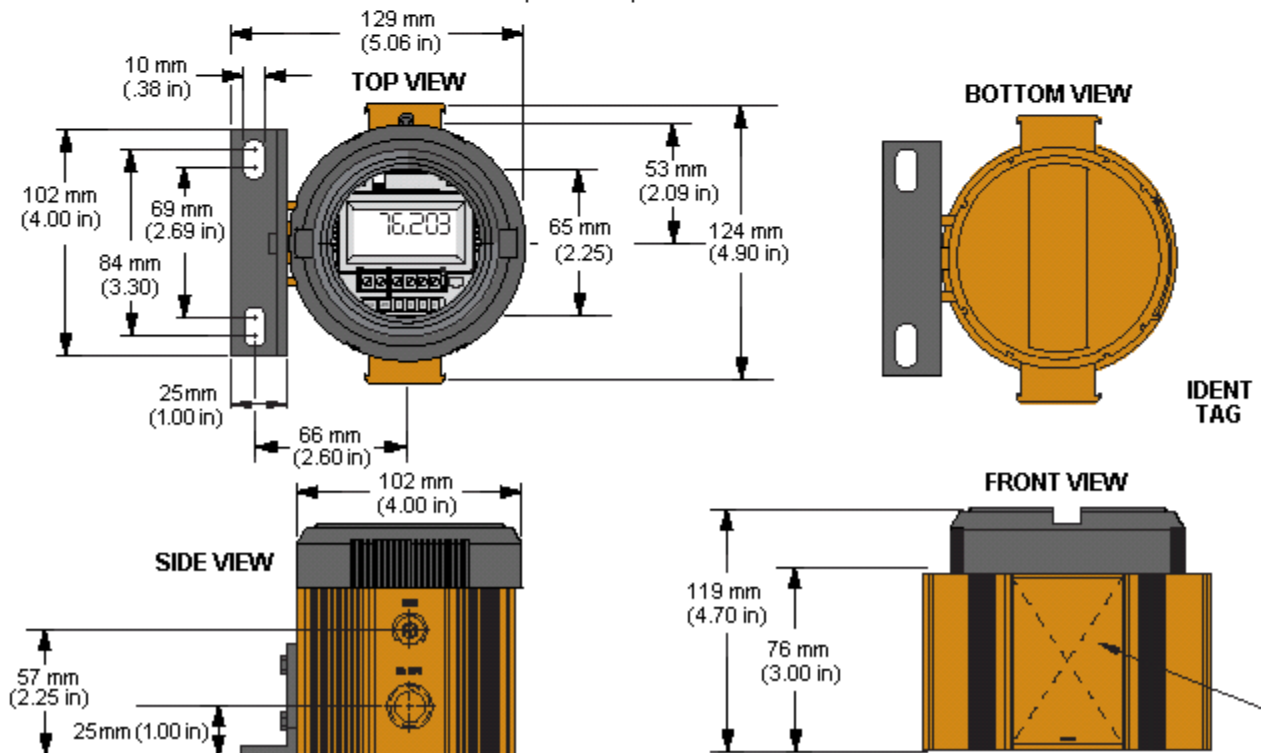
Dimensions of the T5000 with the BH explosion-proof enclosure.
